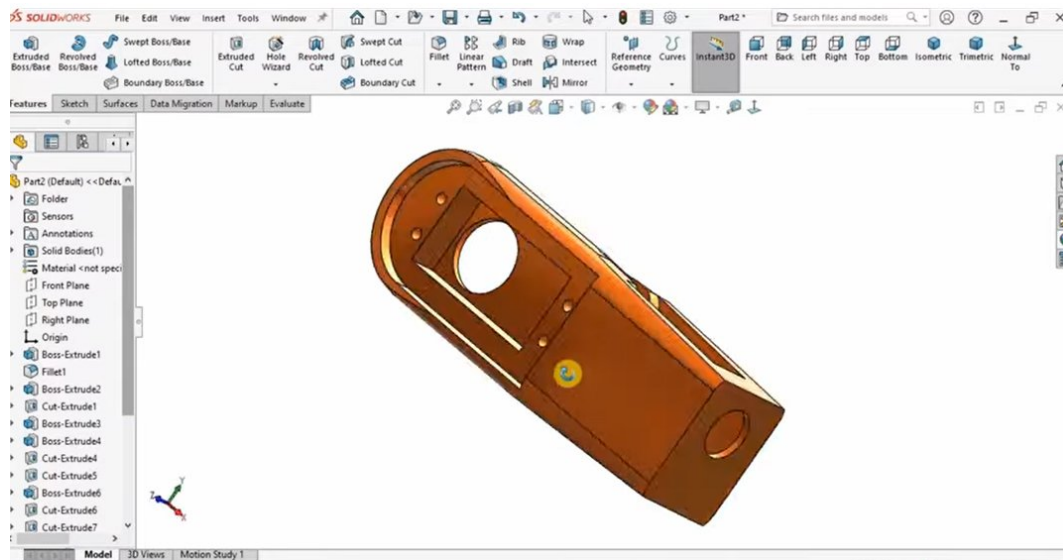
Part 4 — Lower Arm Body | SolidWorks 2022
